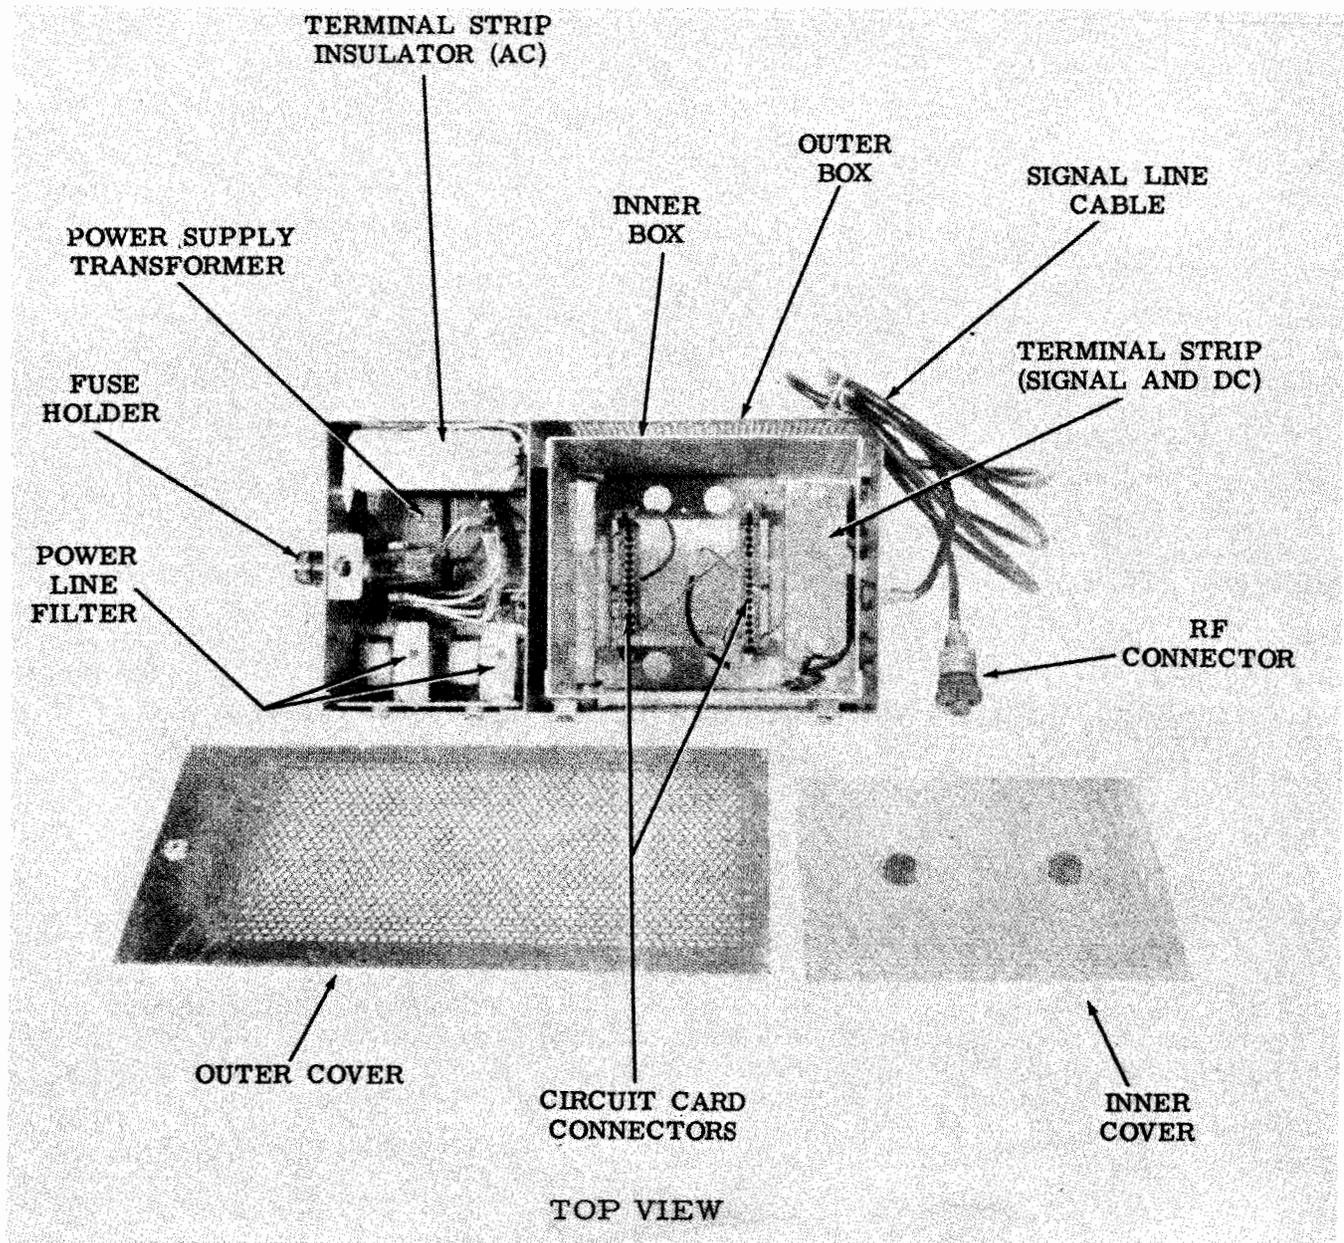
Typical Parts of an ESA - Double Box Construction (Sheet 1 of 2)
